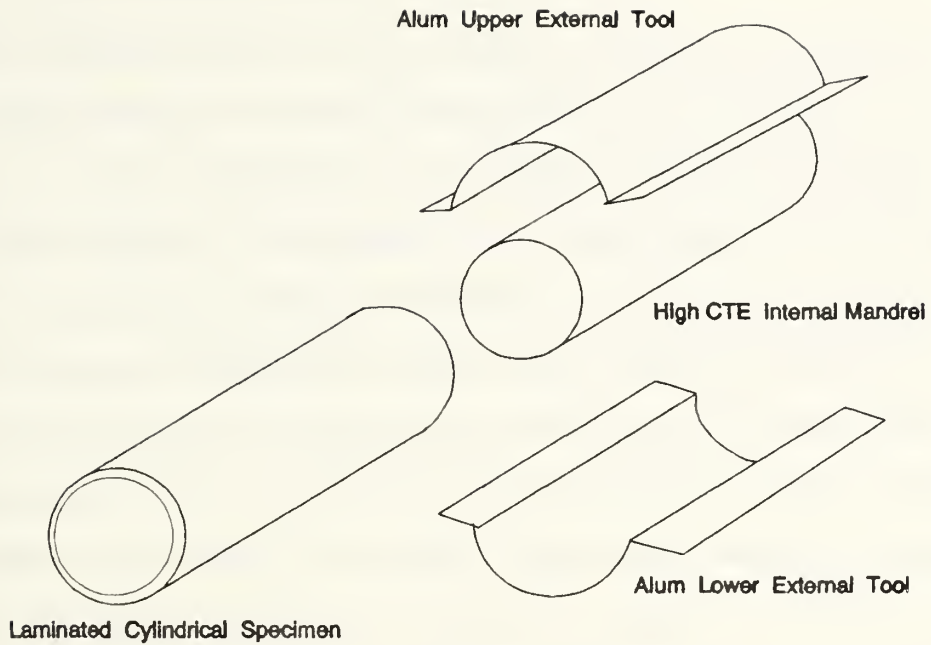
The elastomeric tooling fixture used to manufacture the cylindrical test specimens.
